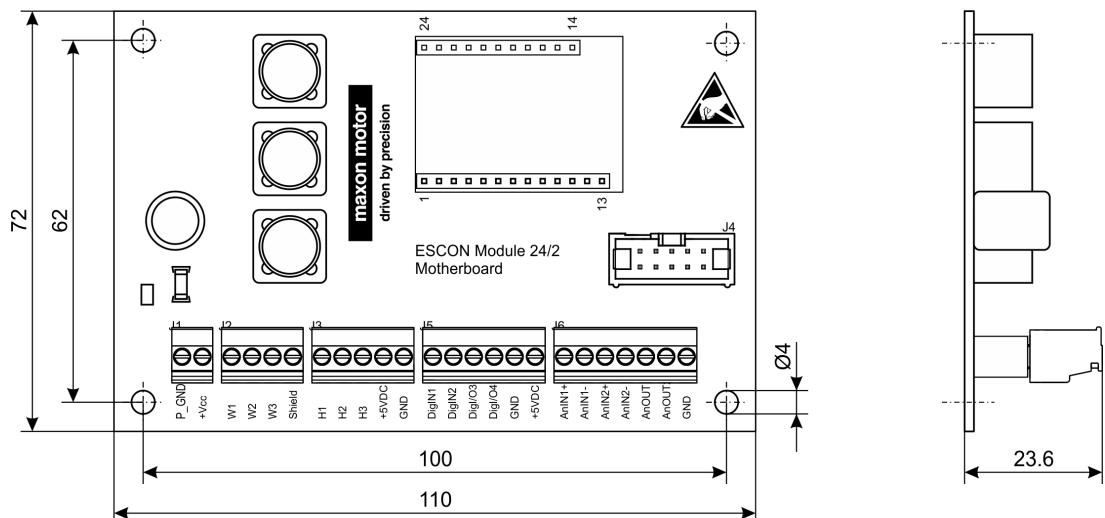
ESCON Module MoBo – Dimensional Drawing [mm]
